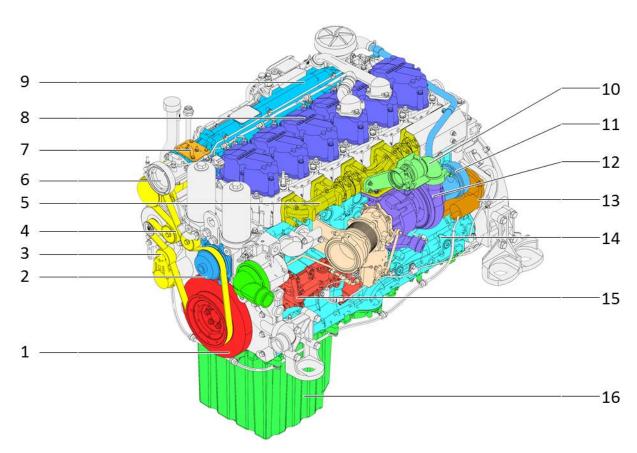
Parts of the diesel engine D936 A7-04 / view from the left
